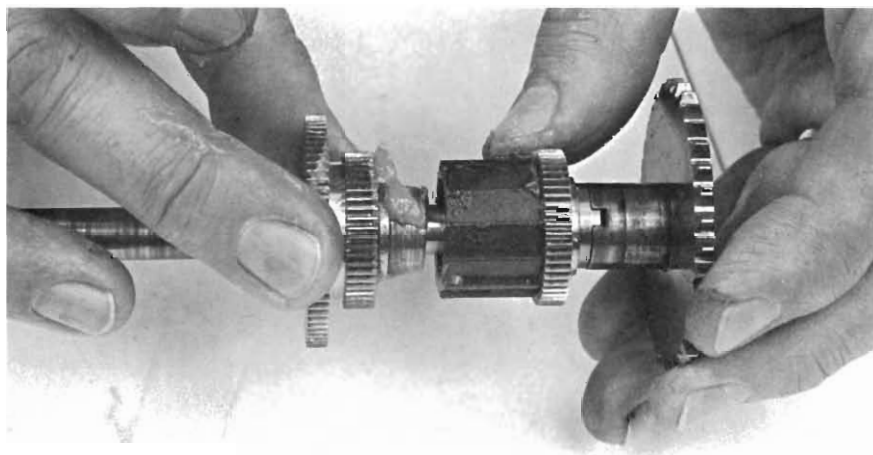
Spring Clutch Lubrication (Primary Shaft)
